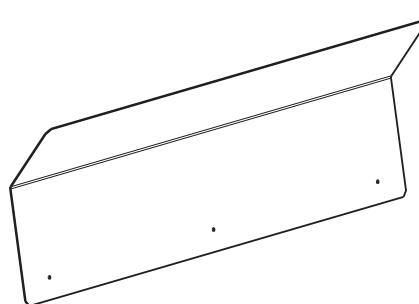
14 in. Inlet Hood View Port Cover Installation
